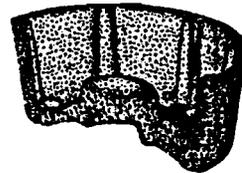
Air craft landing gear wheel (Wheel diameter = 560 mm, Height = 216 mm No of elements = 60,000), by ERC/NSM.
